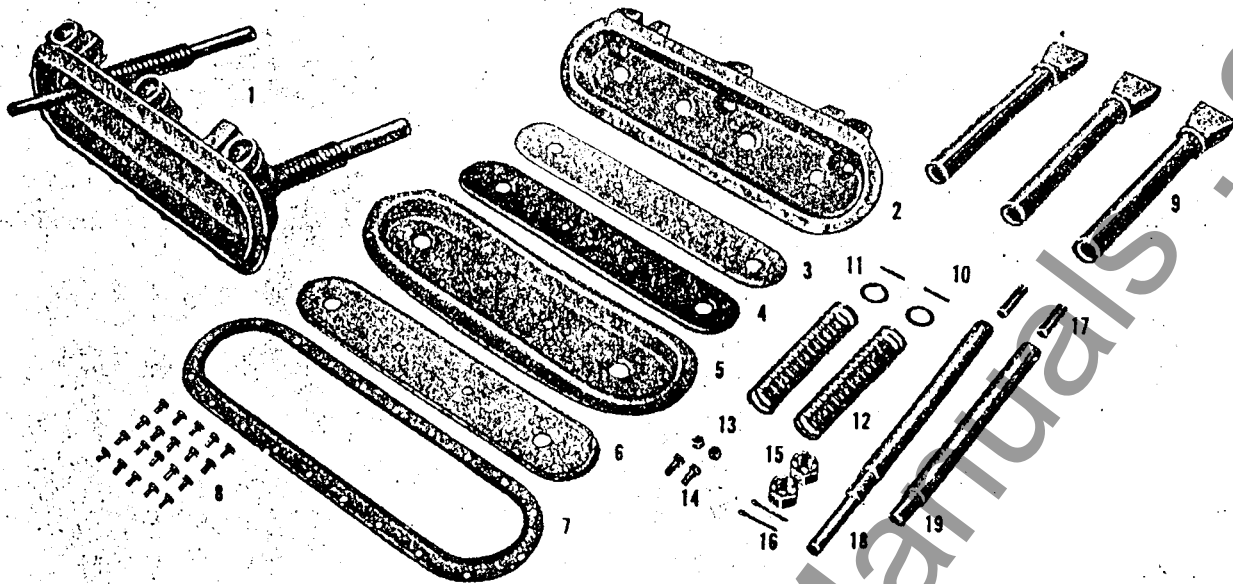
Type 50-DH-150-E, 1200 Ampere Stationary Contact Assembly
